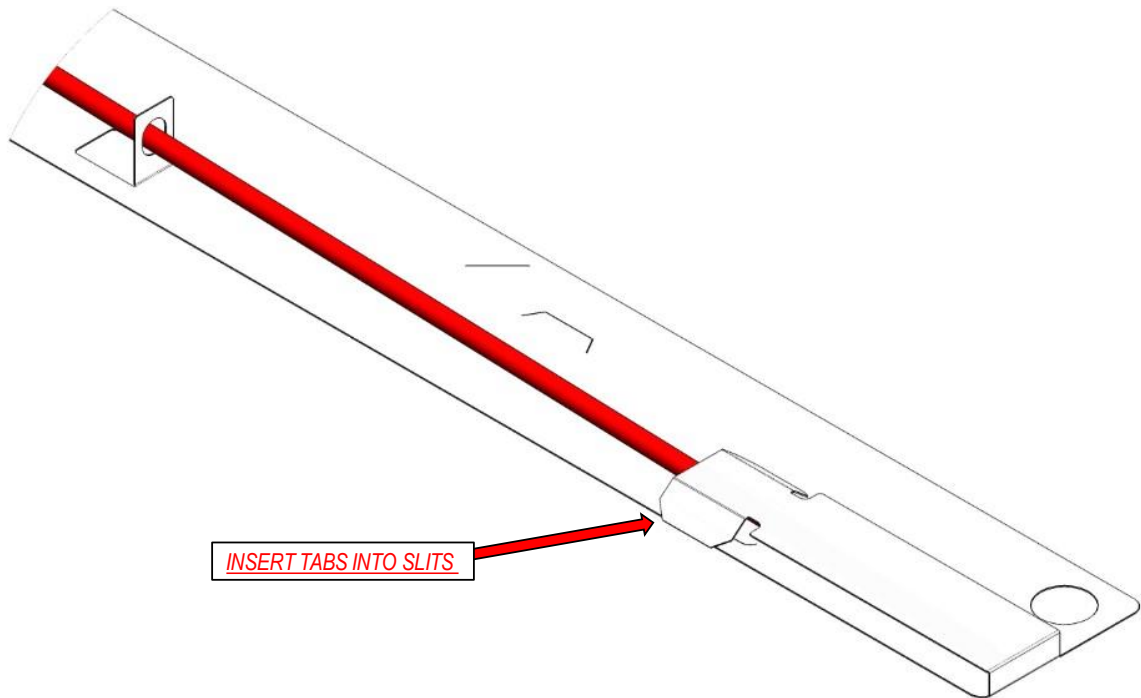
Feed Shaft through eyelet and into pocket formed at right side of card.
